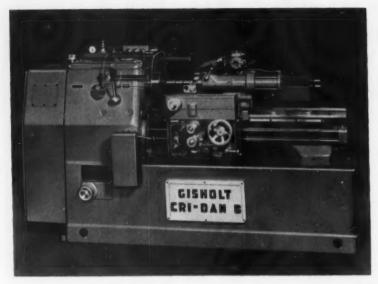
Cri-Dan automatic lathe to be demonstrated by the Gisholt Machine Co.
